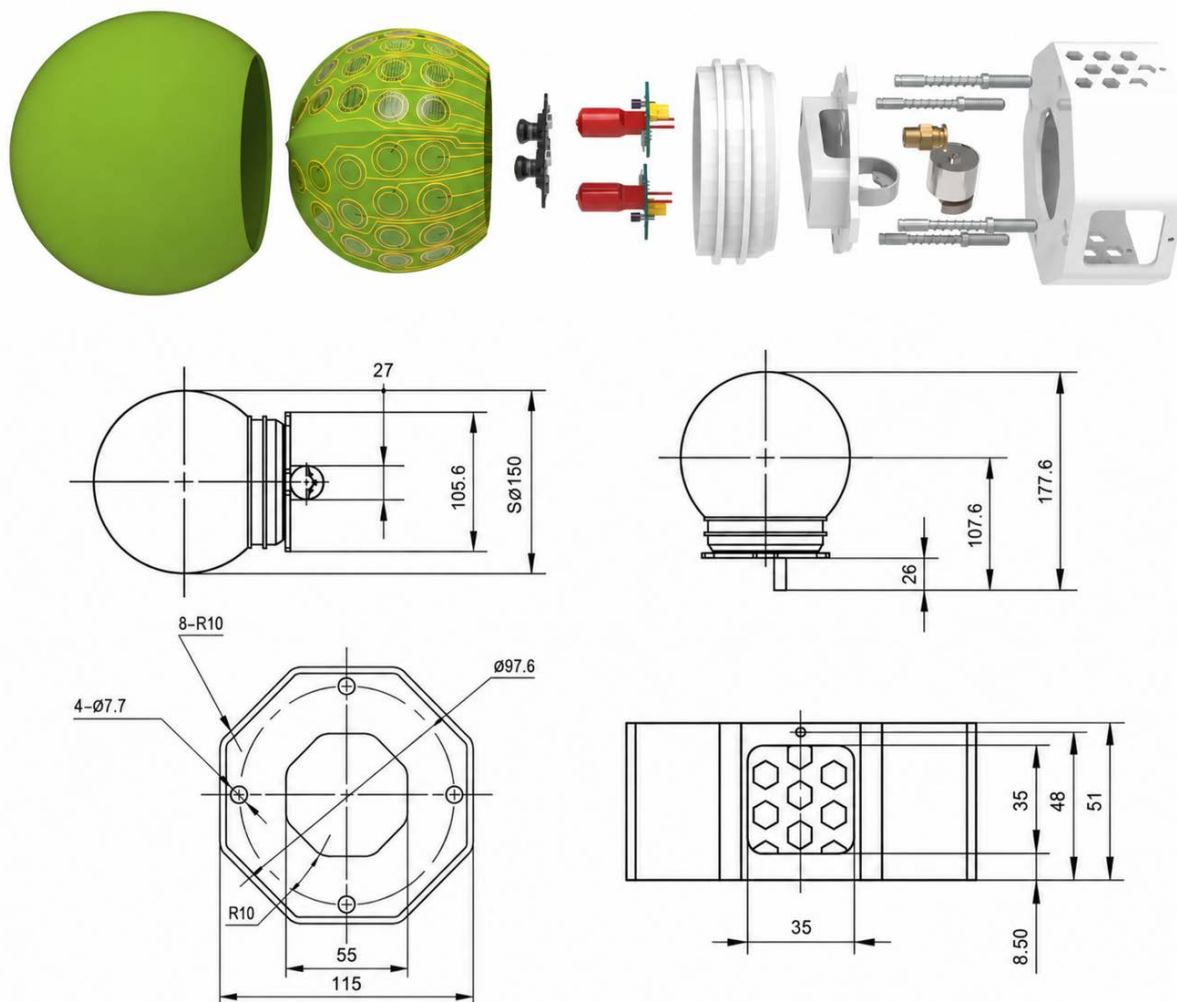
Exploded view and key dimensions of FusionTouch. (A) Exploded view of the FusionTouch assembly, showing the spherical soft shell, patterned electro-tactile and optoelectronic skin, internal vision and actuation components, pneumatic and mechanical connection parts, fasteners, and the base housing. (B) Engineering drawings of the assembled device and base structure, showing the major geometric dimensions used for fabrication and assembly. Dimensions are given in millimeters.
